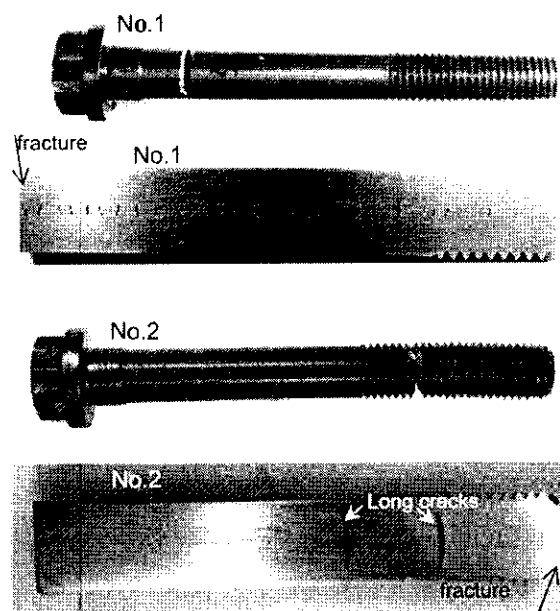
Failed bolts and longitudinal section showing radial cracks.
